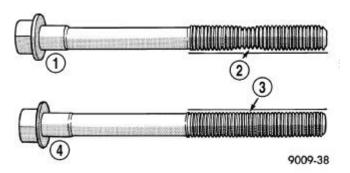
Checking Cylinder Head Bolts For Stretching (Necking) Courtesy of CHRYSLER GROUP, LLC
